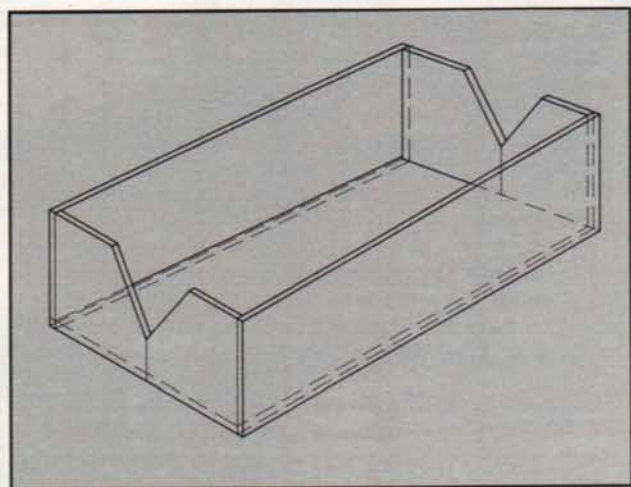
A setup box, easily made from inexpensive particle board shelving, is especially handy for getting the wing/stab alignment correct; text explains how it's used. A couple of hours spent making a simple fixture like this can save you many hours and much grief trying to trim a crooked airplane!
